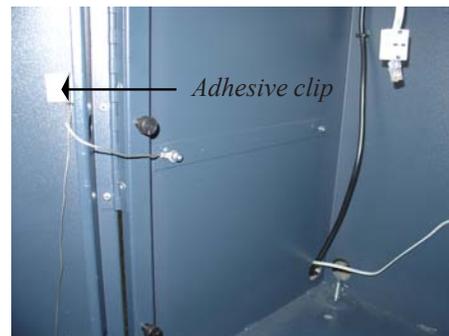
Move hex nuts to lower mounting bolts. Connect ground wire.
